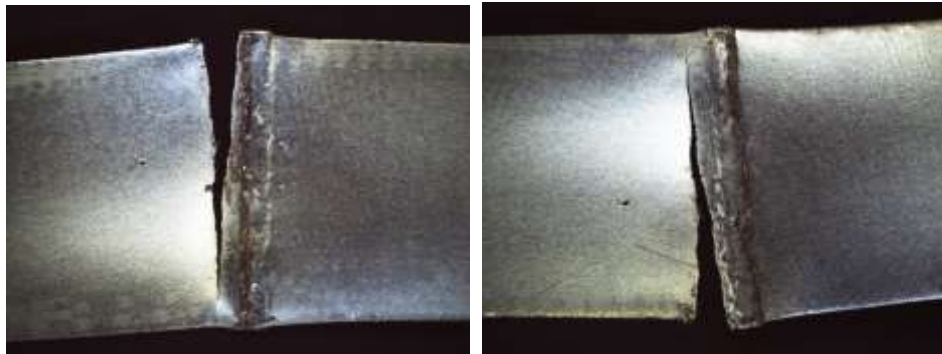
Macrophotography of the fracturing joint on sample No 5
